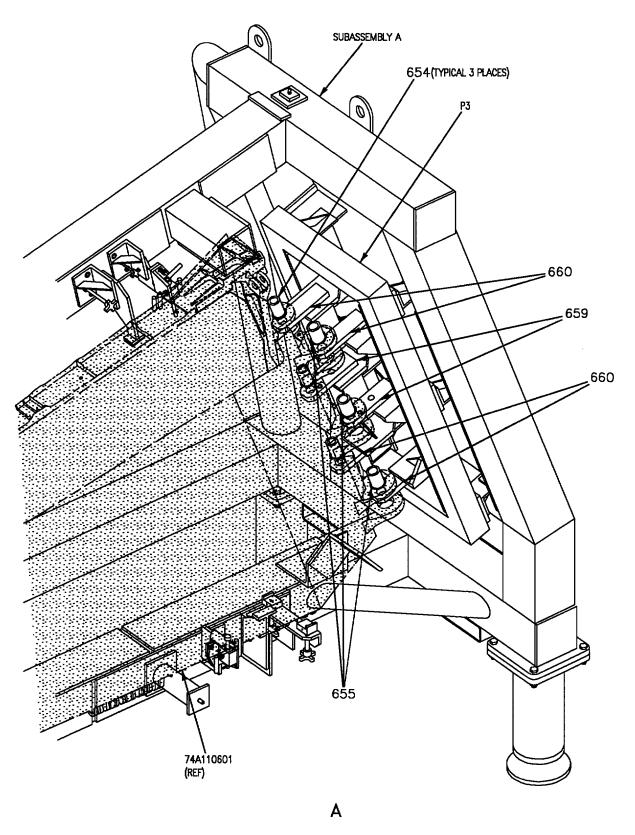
Locating Upper and Lower Skins (Sheet 2)
